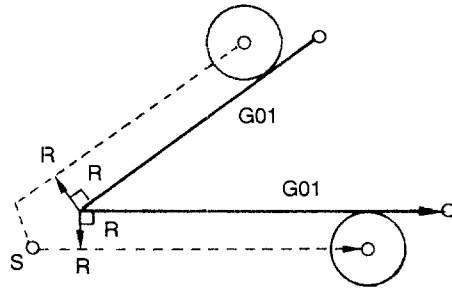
Offset Motion (Straight-line to Straight-line)
